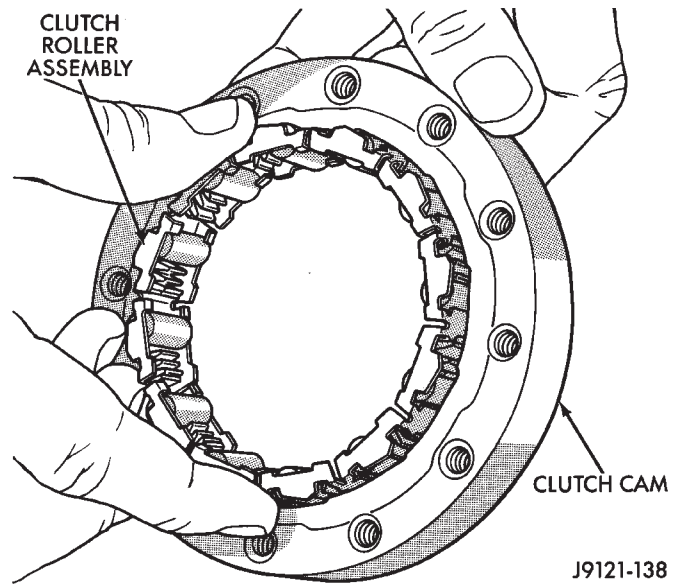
Overrunning Clutch Rollers, Springs, Retainer
